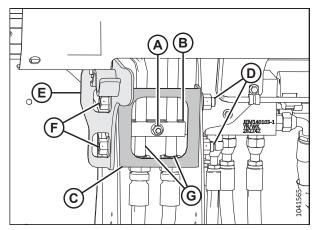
Center Header Leg with HDS Installed – Right Side
